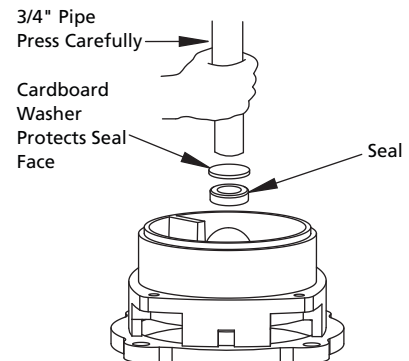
If Necessary, Press With Cardboard And Pipe.
